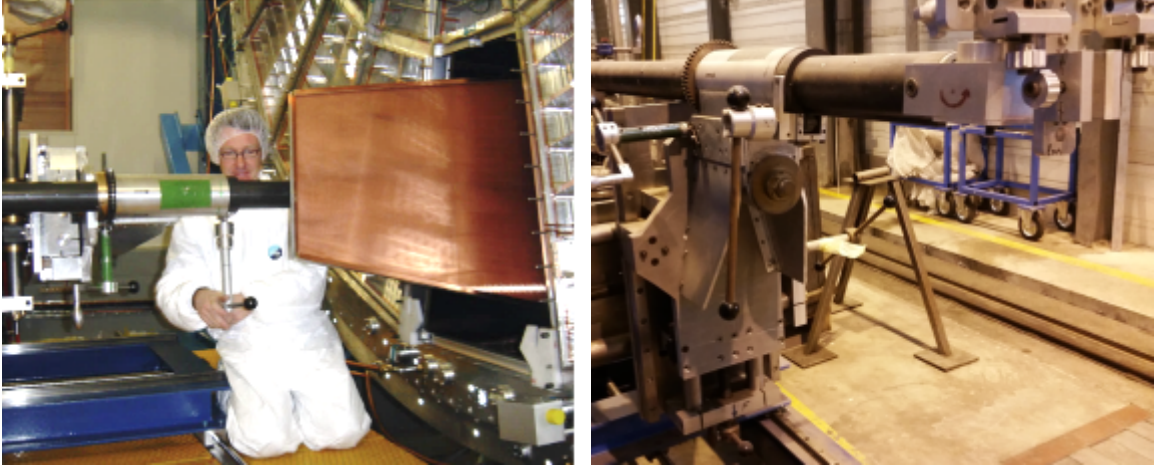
Photographs of the TPC sector manipulation tool used in assembly of the ALICE TPC at LHC.
